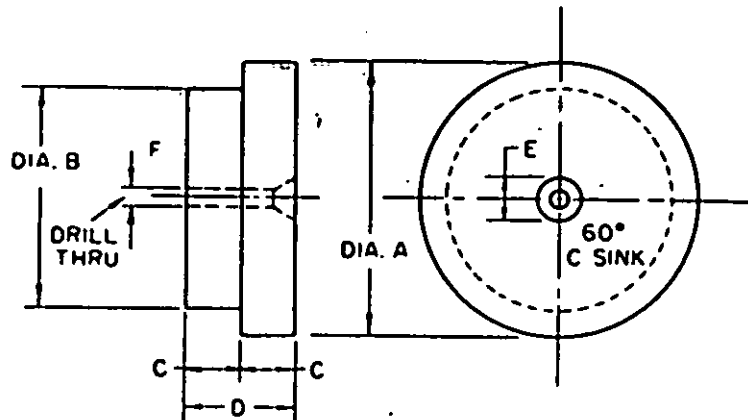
Type XIII, class 4, puller adapter, mechanical, gear and bearing, step plate.
